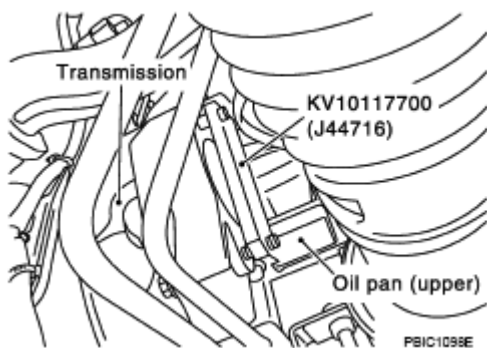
Identifying Rear Cover Plate (2WD Models) Or Starter Motor (AWD Models) And Set Ring Gear Stopper (SST)
